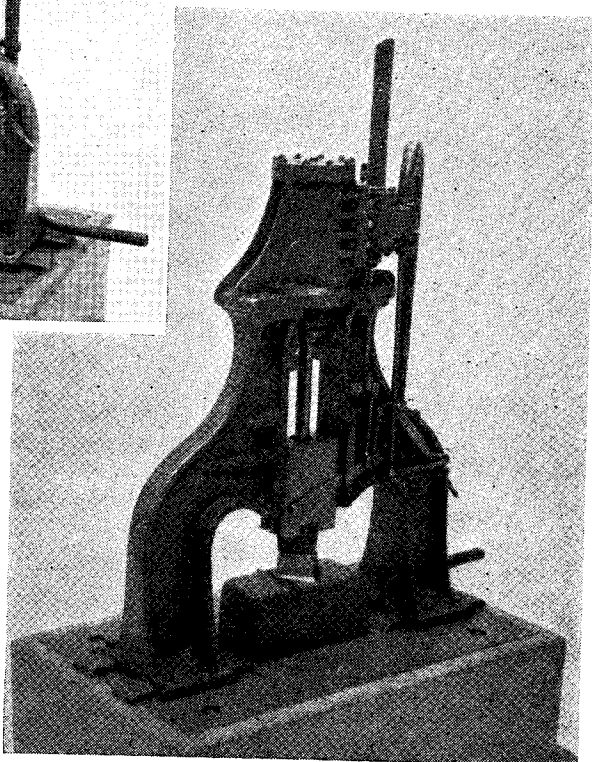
A fine working model steam-hammer built by Mr. F. J. Haynes, of Manchester. In this photograph the upper pallet is supported by a small piece of wood
